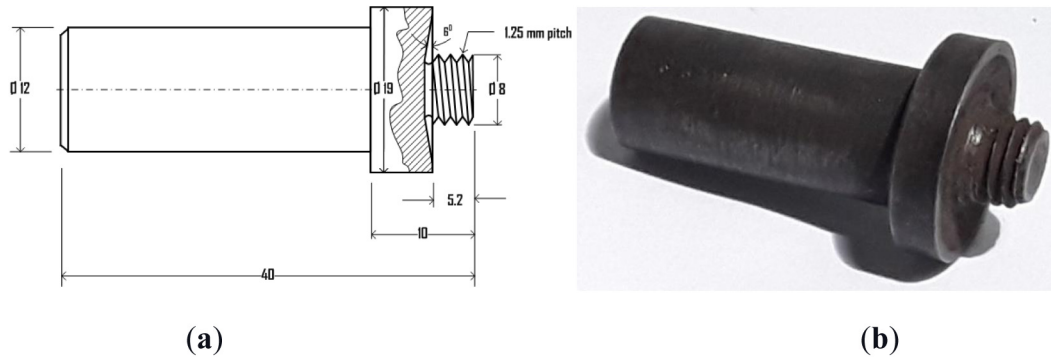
(a) H13 FSW tool schematic diagram; (b) FSW tool photograph.
